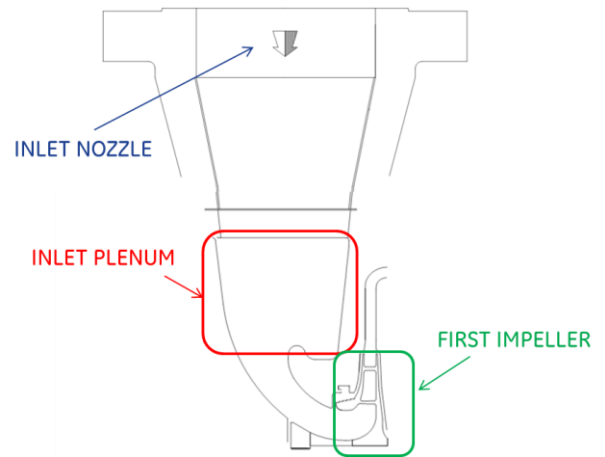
Sectional drawing of a centrifugal compressor inlet portion, from nozzle to first impeller.
